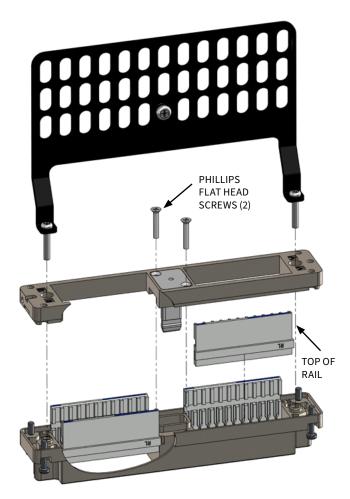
Figure A. VTAC HSD Rail(s) install/removal (receiver shown).
